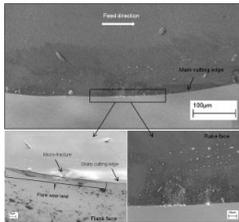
SEM photographs of the cutting edge being taken after the sixth cut
